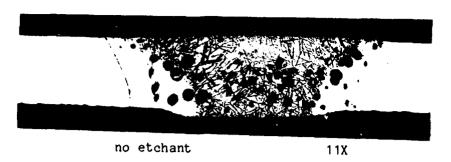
Autogeneous weld made with no preweld heat treatment, AC
